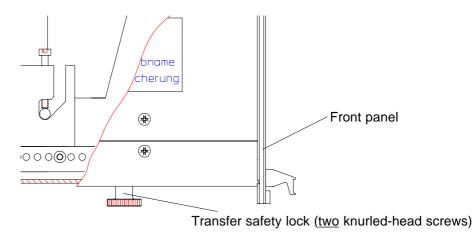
Transfer safety lock (housing side view, detail sketch)
